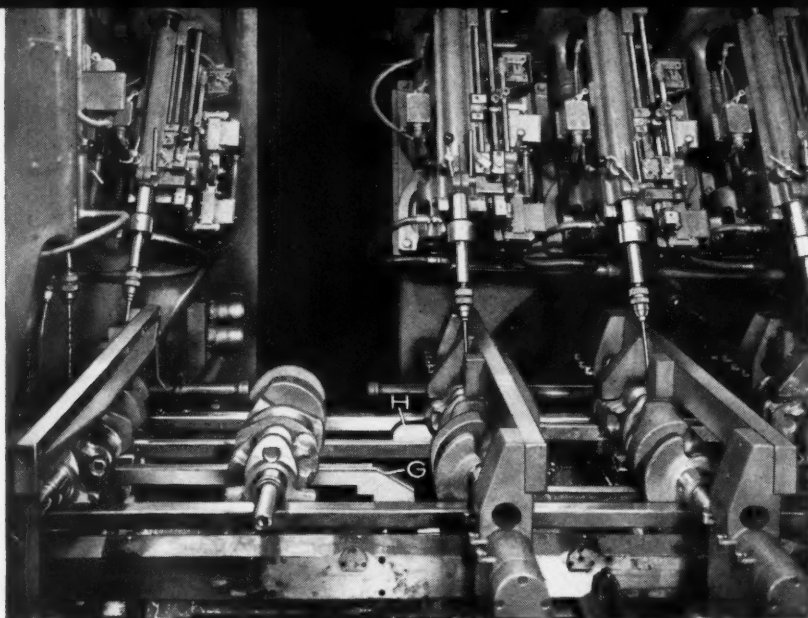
Close-up View of Transfer Machine, Showing the Means Provided for Rotating the Crankshaft through an Angle of 90 Degrees
